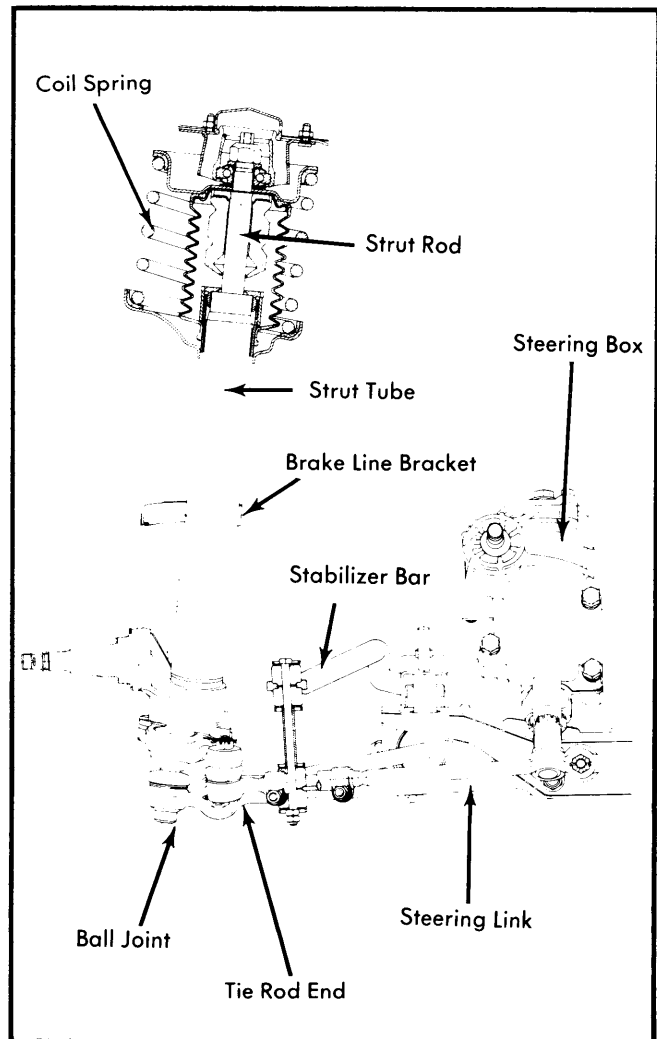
BMW 530i and 630CSi Front Suspension Assembly
